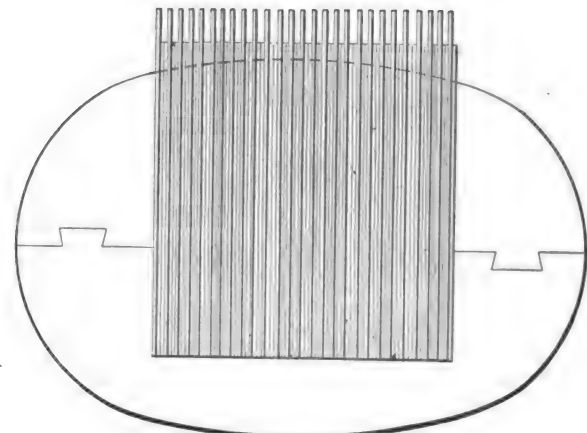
BOTTOM VIEW OF FIELD MAGNETS.
